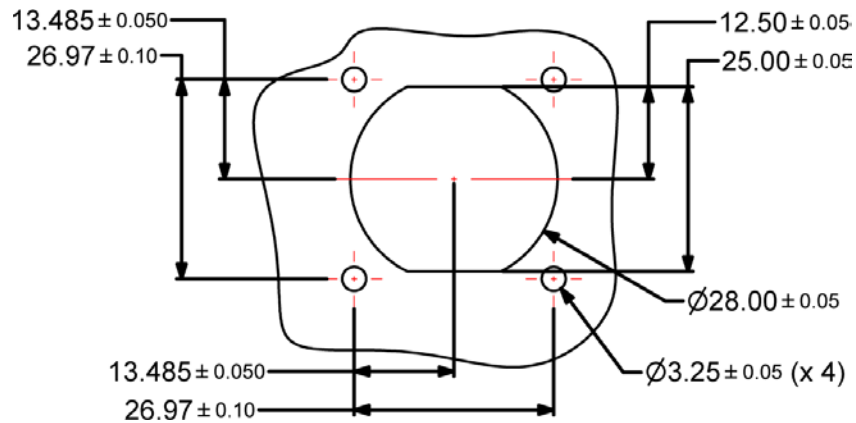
Recommended Panel Cutout for Flange Mount Zinc Die-Cast Version
